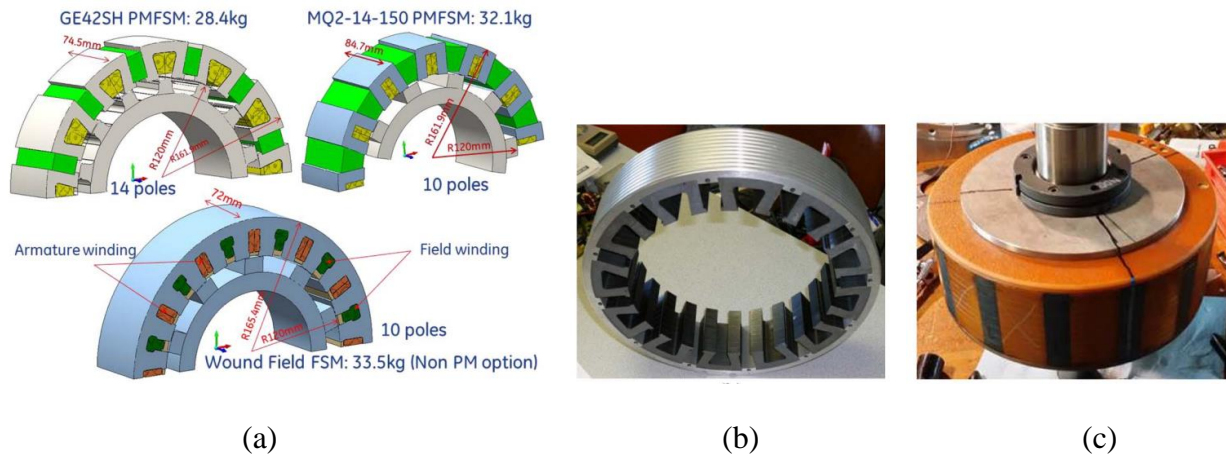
Flux-switching machines designed for traction application, (a) three flux-switching machines with and without PM, (b) prototype stator, (c) prototype rotor [242].
